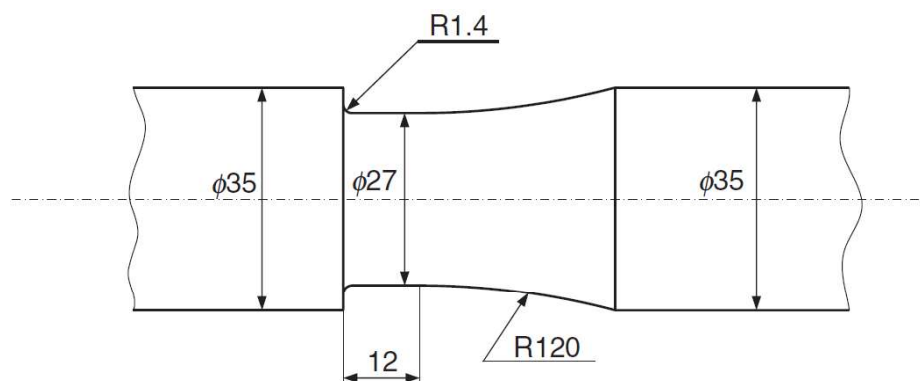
Shape and dimensions of S460N shouldered shaft specimen [83]. All dimensions are given in mm.
